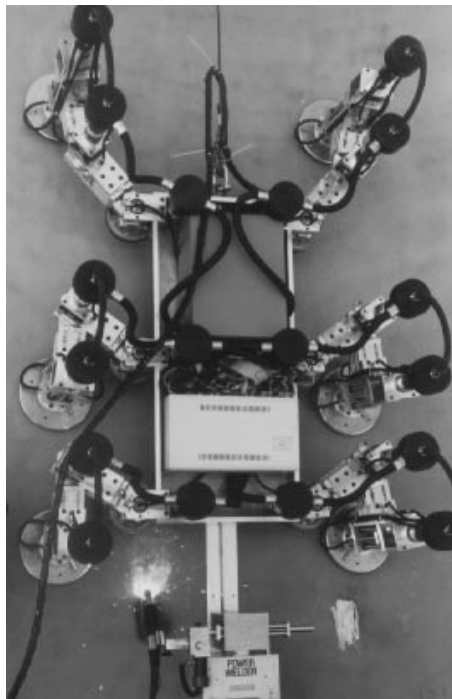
REST 1 climbing robot welding ship hull.
